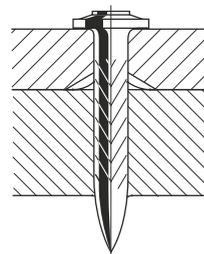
Fastening components with predrilled holes, countersunk on the reverse side
